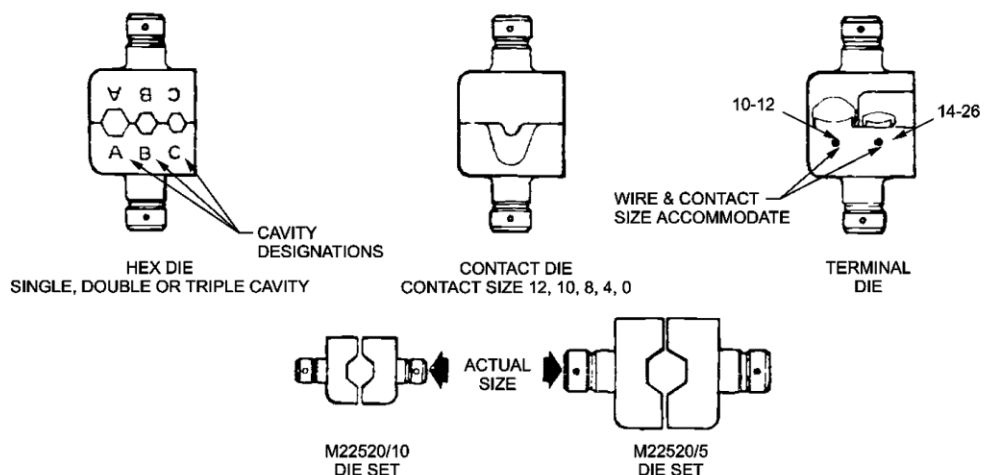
Crimp Tools and Dies (Sheet 1 of 2)
